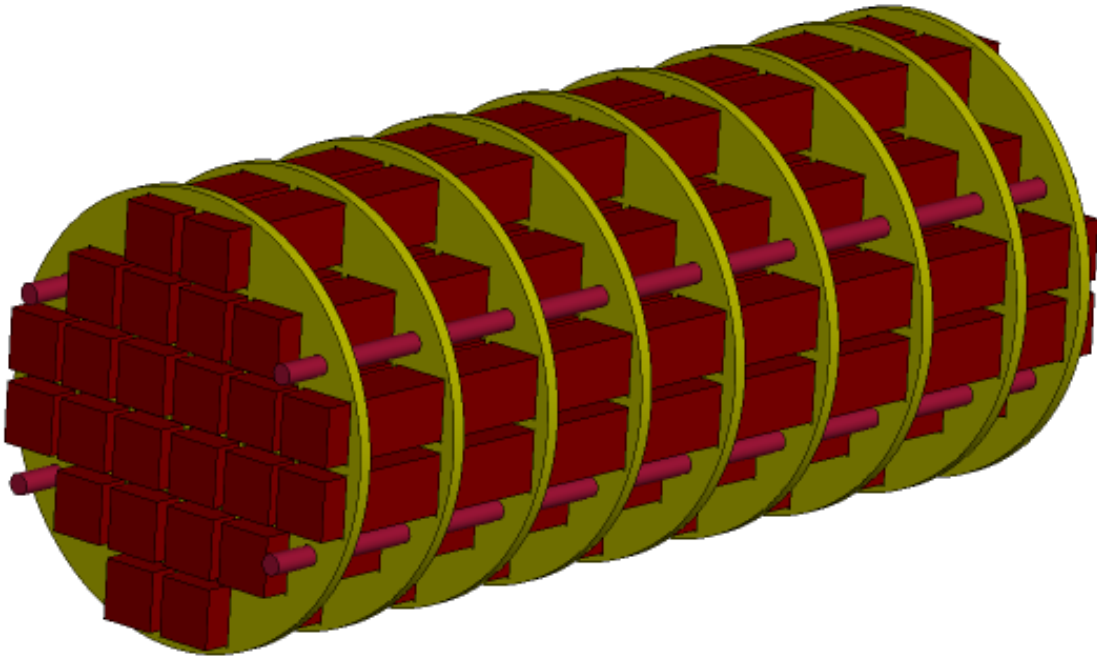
Three-dimensional schematic for the fuel assemblies, tie rods, and spacer plates within the DSC shell
